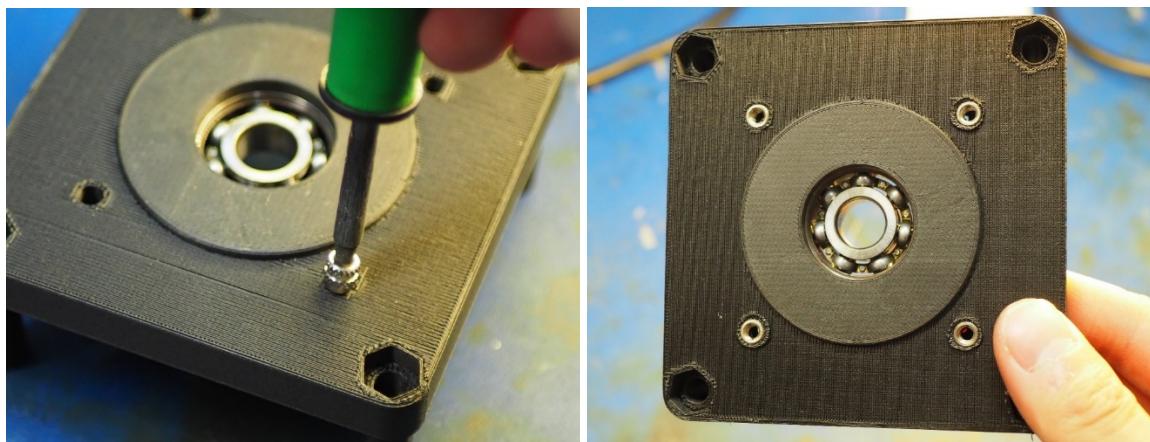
Thermosetting the threaded insert with a heated soldering iron.
